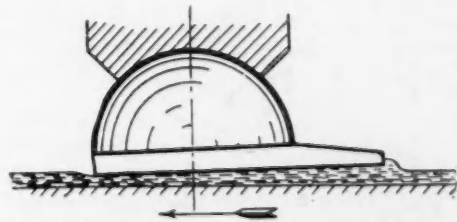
SLIPPER OF CRANKLESS ENGINE, SHOWING WEDGE FORM OF OIL FILM
